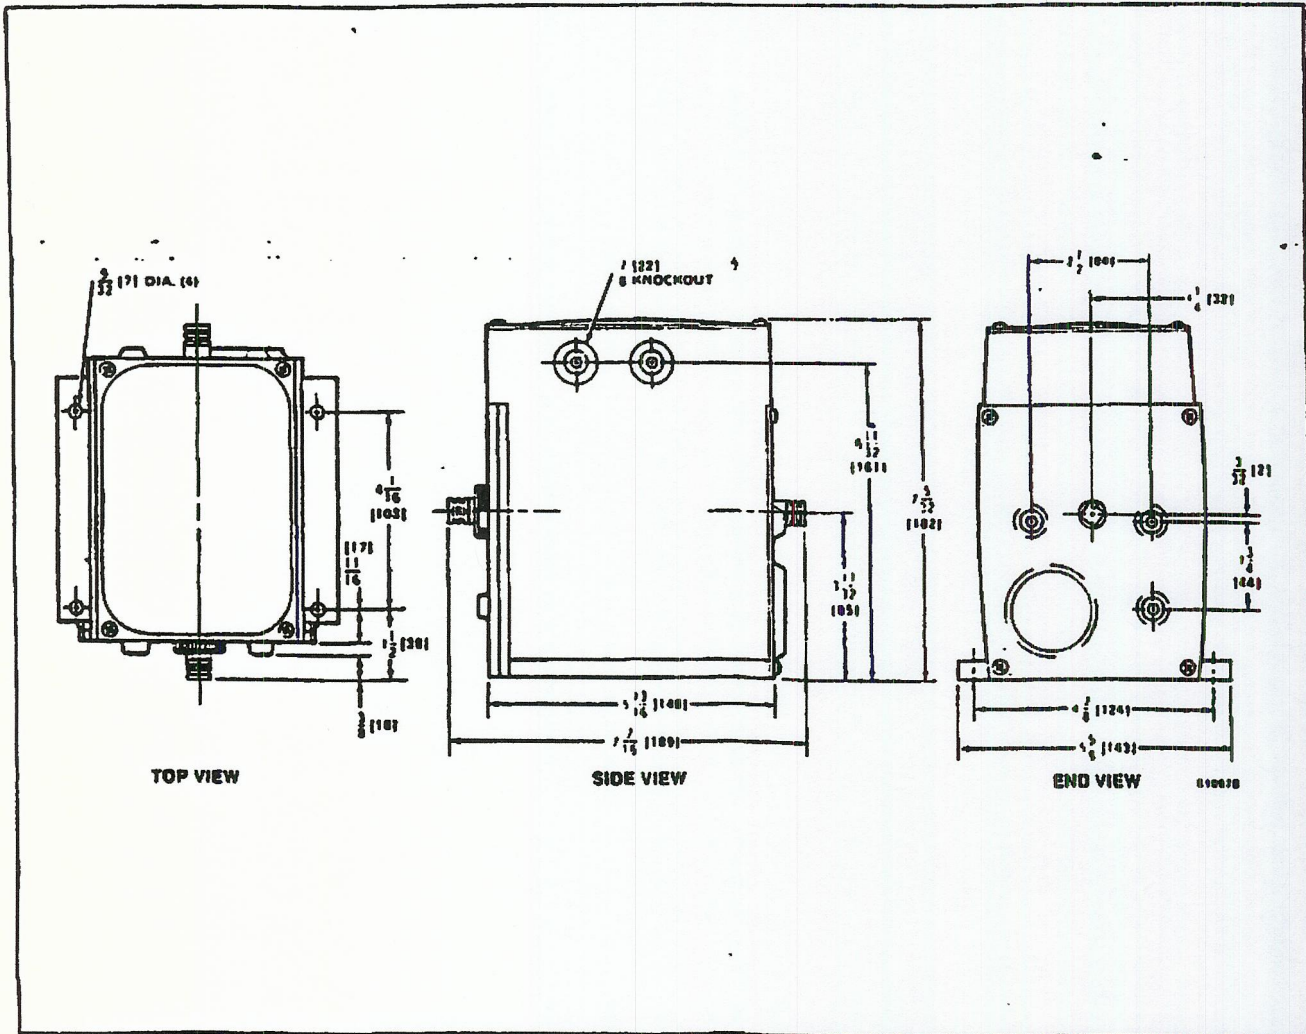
APPROXIMATE DIMENSIONS OF 894-3435 MOTORS IN In. (mm SHOWN IN BRACKETS).
